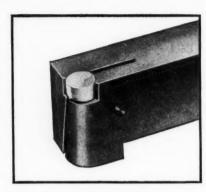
Tool with Clamped-in Solid Kennametal Round Insert
